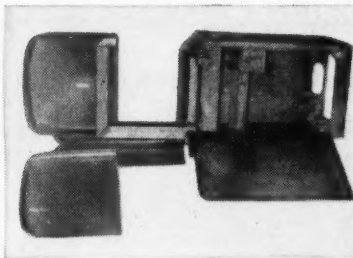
All Welded Steel Frame for the Parks Woodworking Machine Co., Cincinnati, Ohio. Sides are made formed from 12-gauge metal.
